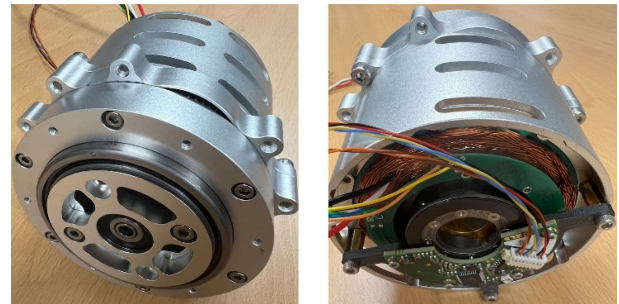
The front and back view of the developed actuator. An absolute encoder is installed on the back side
